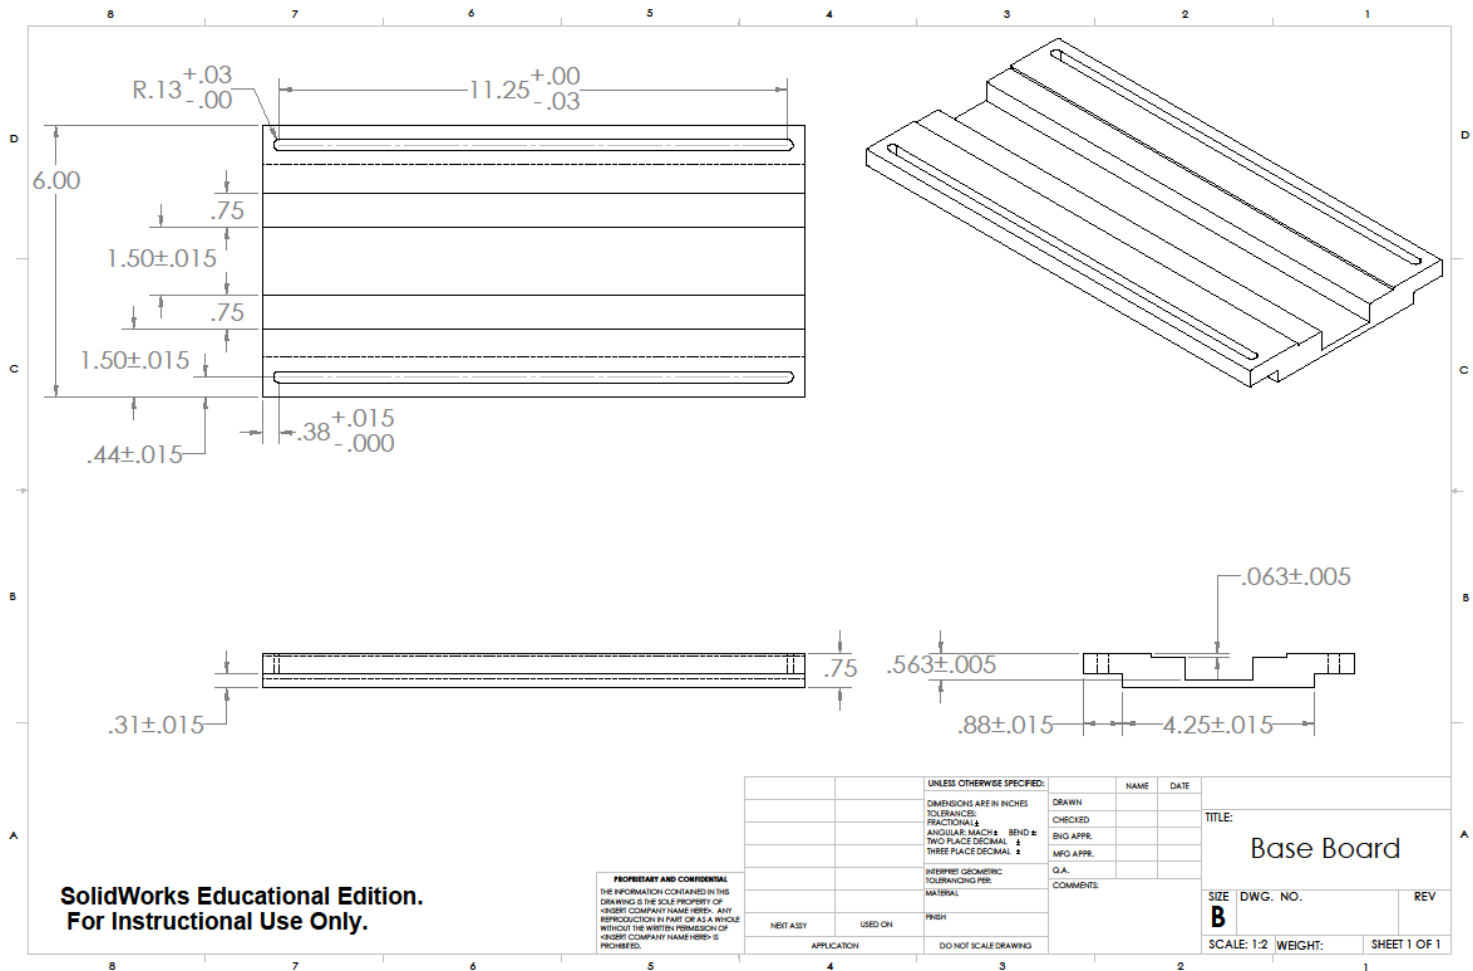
Technical drawing of the G-10 stationary base. All dimensions in inches.
